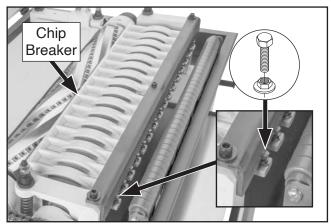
Location of chip breaker frame and adjustment components (G0988 shown)
